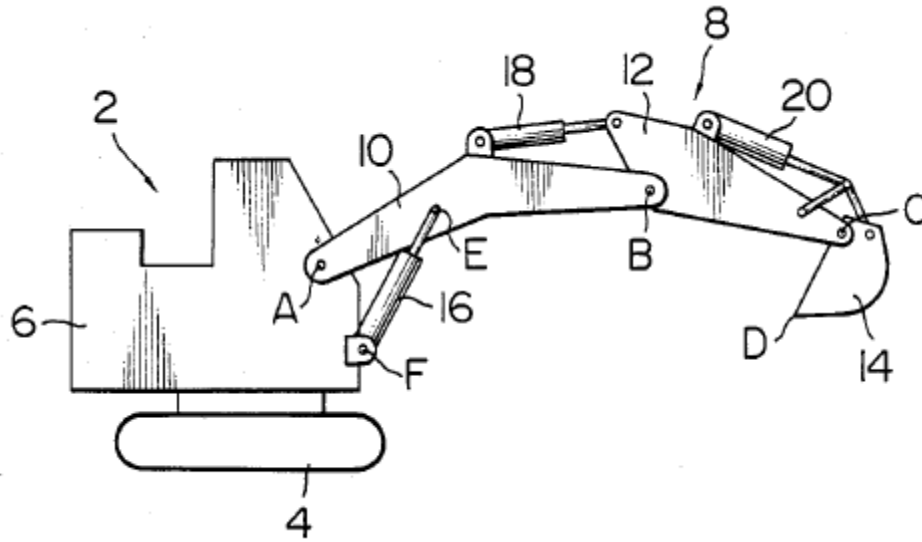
A material moving machine with a multipart linkage that consists of 3 cylinders and a bucket.
